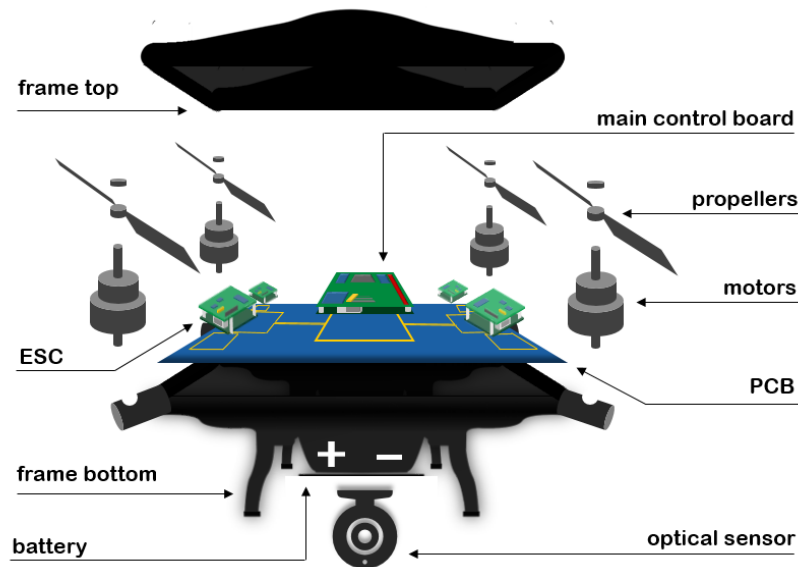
Simplified multirotor exploded assembly diagram [Greco, 2016]
